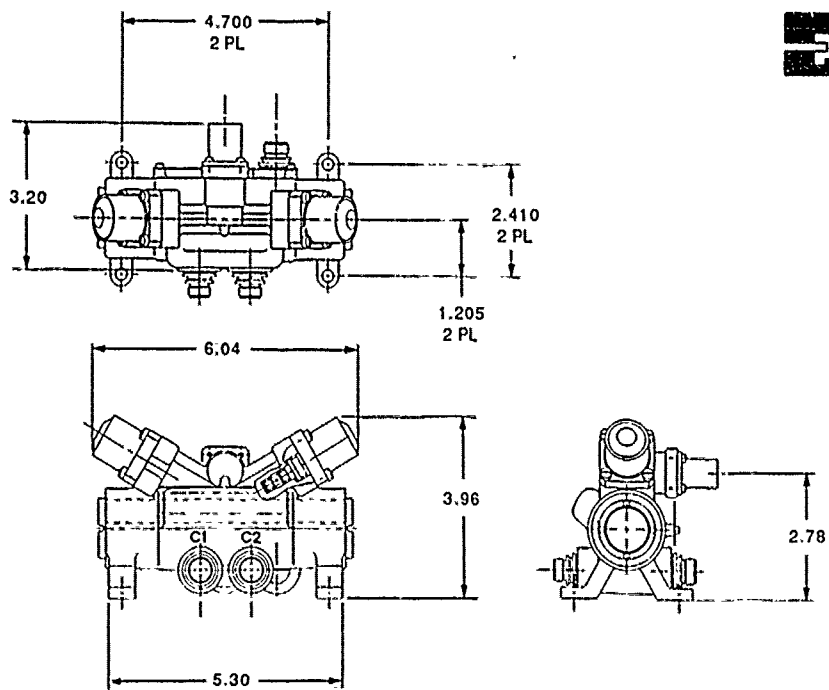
Parker - Selector Valve (4W-3P) Outline Drawing
